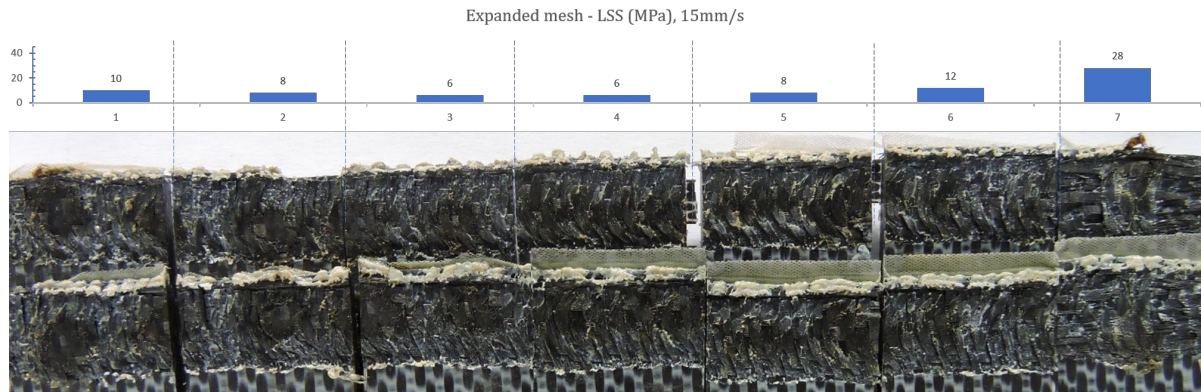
The fracture surfaces at a welding speed of 15mm/s
